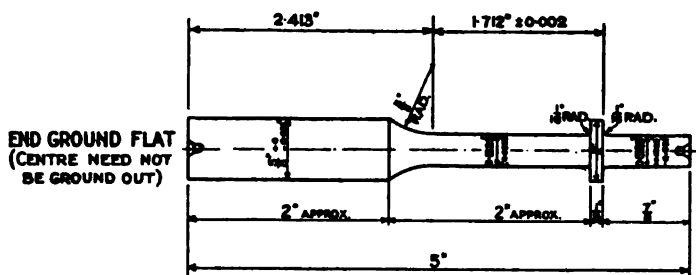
B.—STANDARD TEST PIECE FOR WÖHLER FATIGUE TEST.
